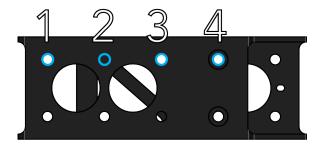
Holes on 100 mm Hollow Offset Link
